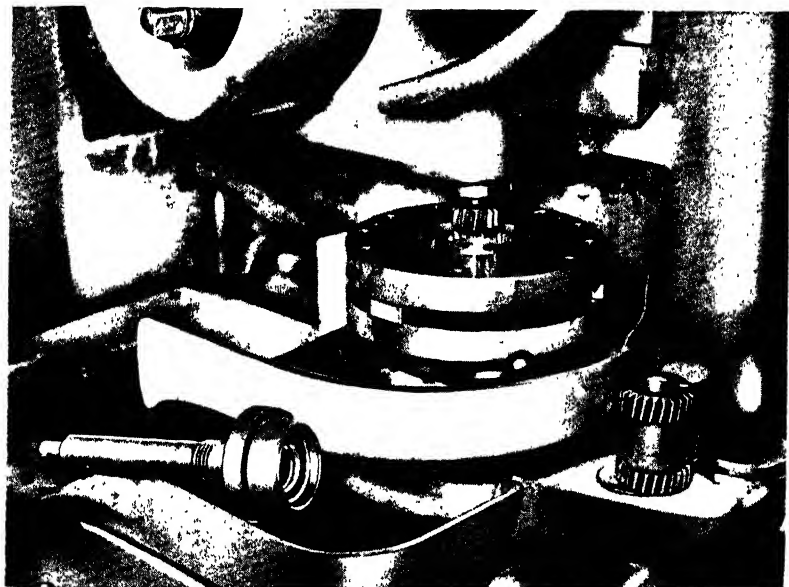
Cutting Internal Teeth in a Clutch Drive-gear
